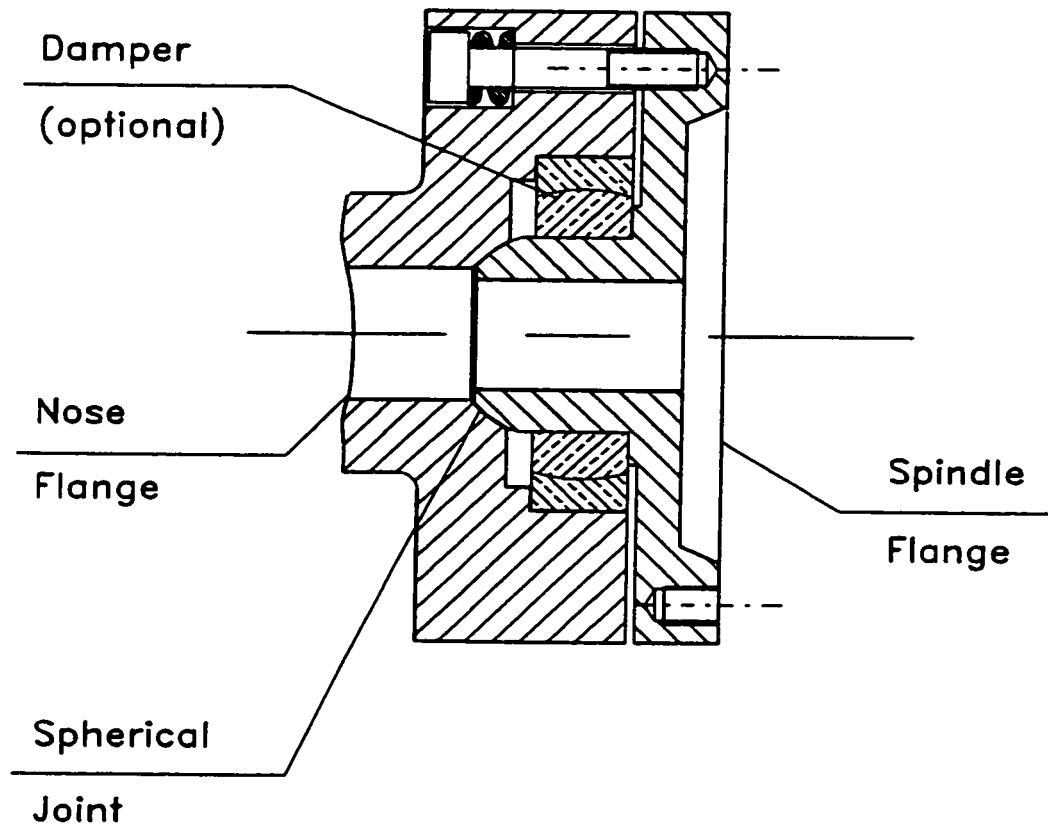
A Spindle Assembly Incorporating a Spherical Joint [6]
